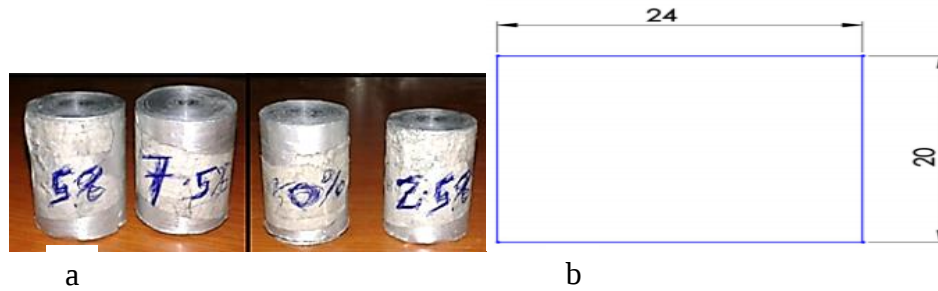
11. (a) Hardness Test Specimens, (b) final Dimension of Hardness Test Samples
